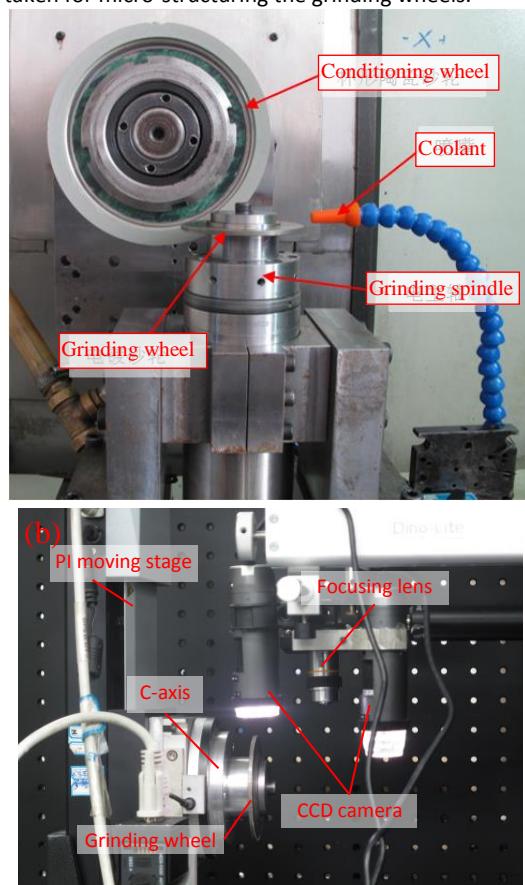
Machine tool configuration for polishing (a) conditioning and grinding setup (b) laser micro-structuring setup.
